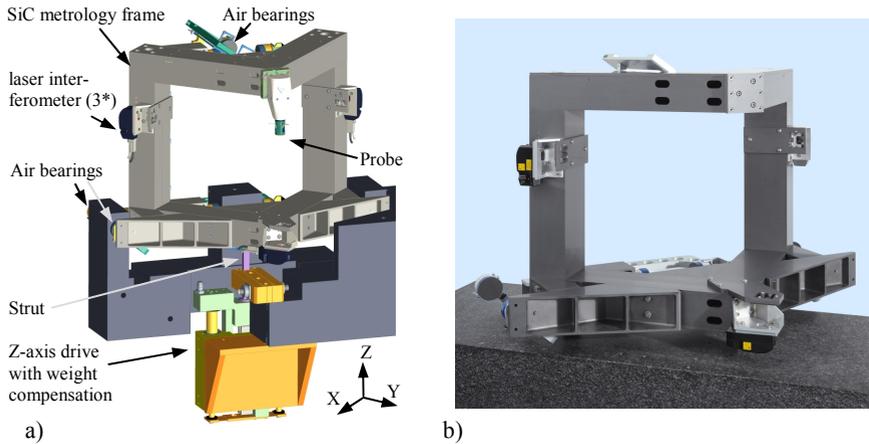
a) Design of metrology frame and Z-axis drive. Granite guiding surfaces are only partially shown; b) Realized SiC metrology frame.
